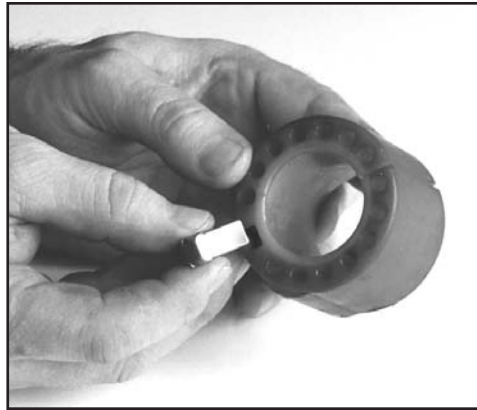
REMOVE EXHAUST RING SAFETY SEGMENT
